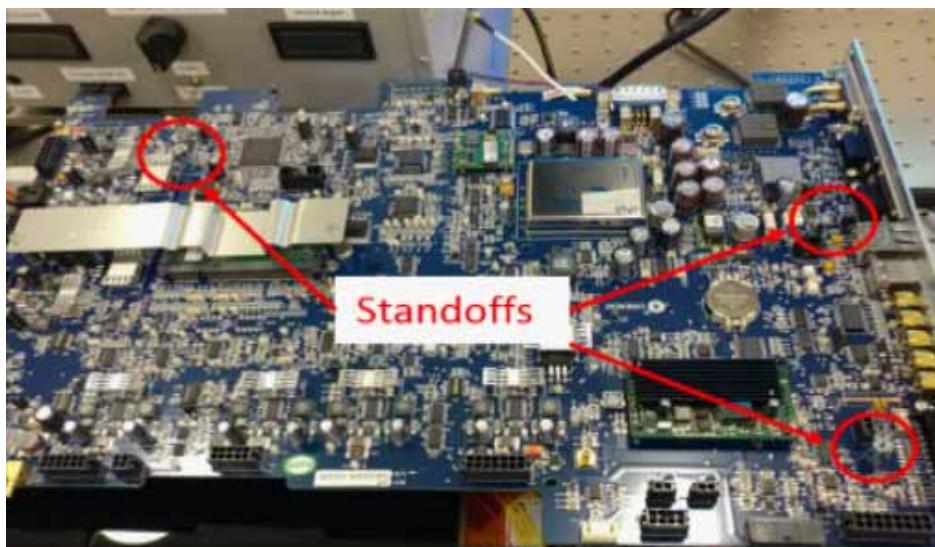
Mounting the Headboard to Housing (Continued)
